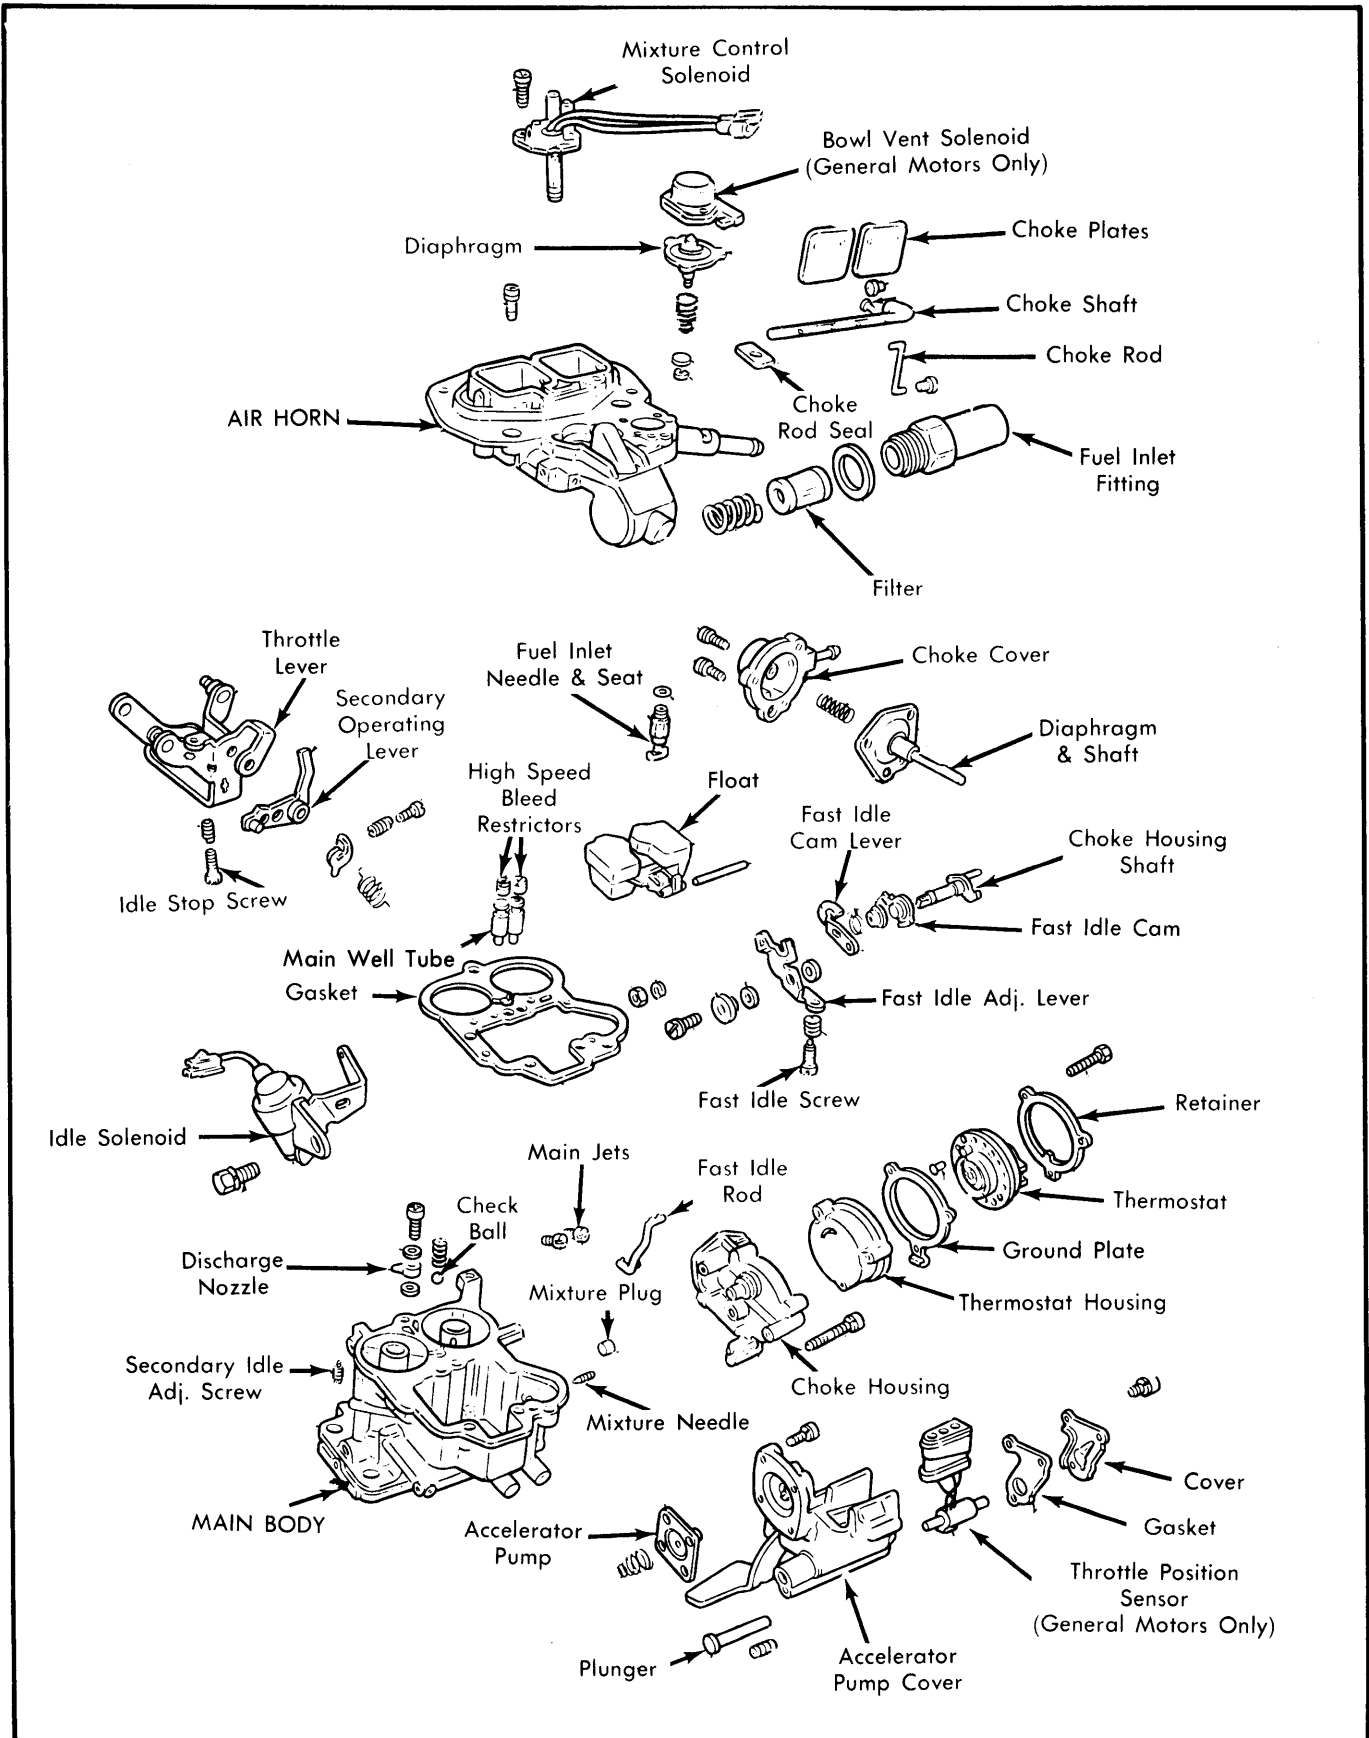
Exploded View of Holley Model 6510-C 2-Barrel Carburetor
